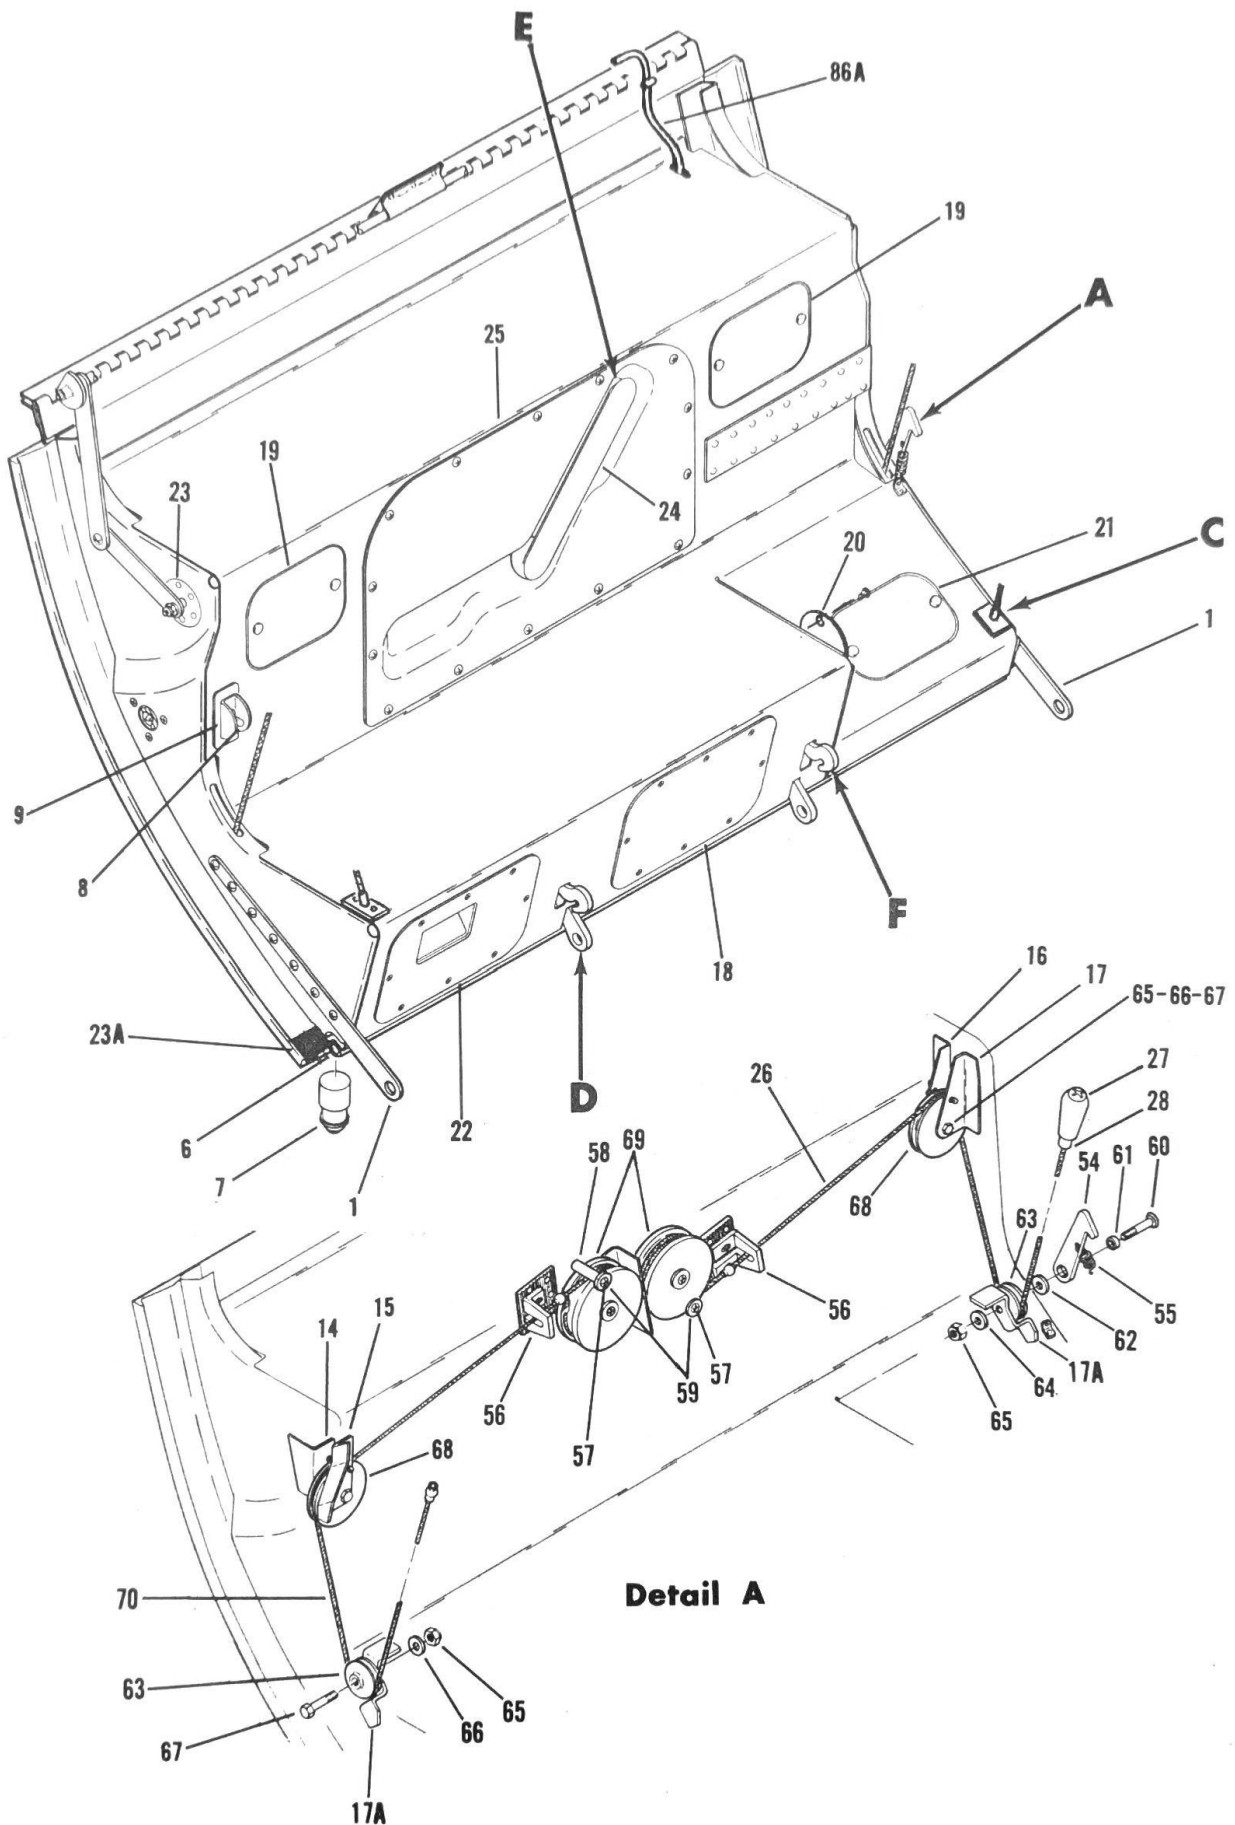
Cabin Door Assembly (Lower) (Sheet 1 of 2)
